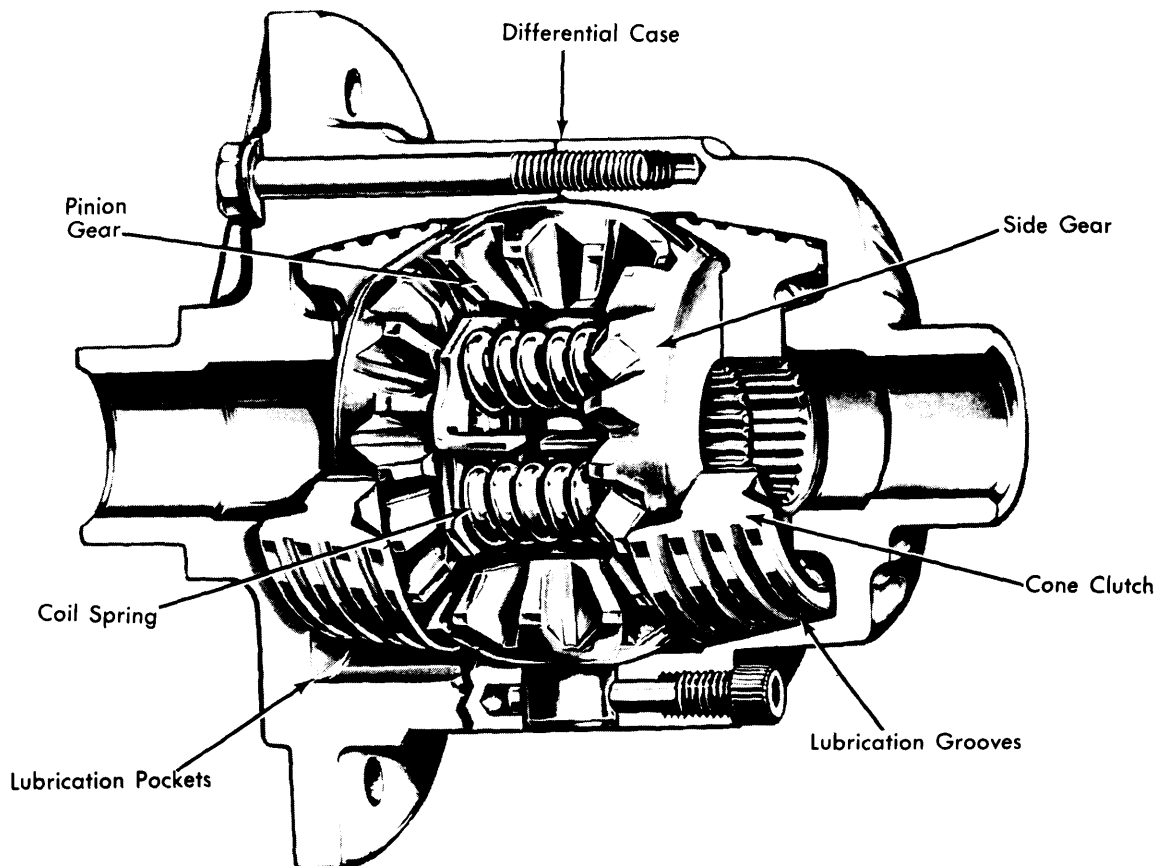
Cutaway View of Chrysler Corp. Sure-Grip Differential Assembly
